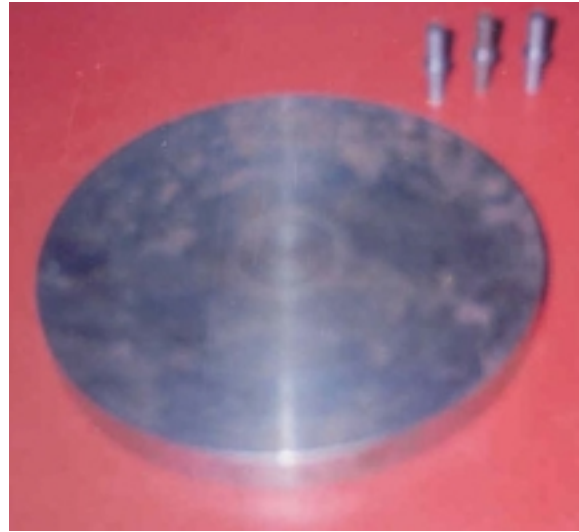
Wear Test Specimen (a) Disc (b) Pins
